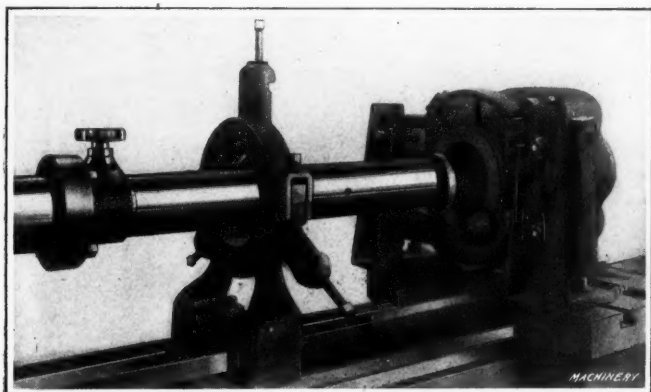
"Perfection" Cylinder Grinder made by Wood & Safford Machine Works for Use on Engine Lathe
